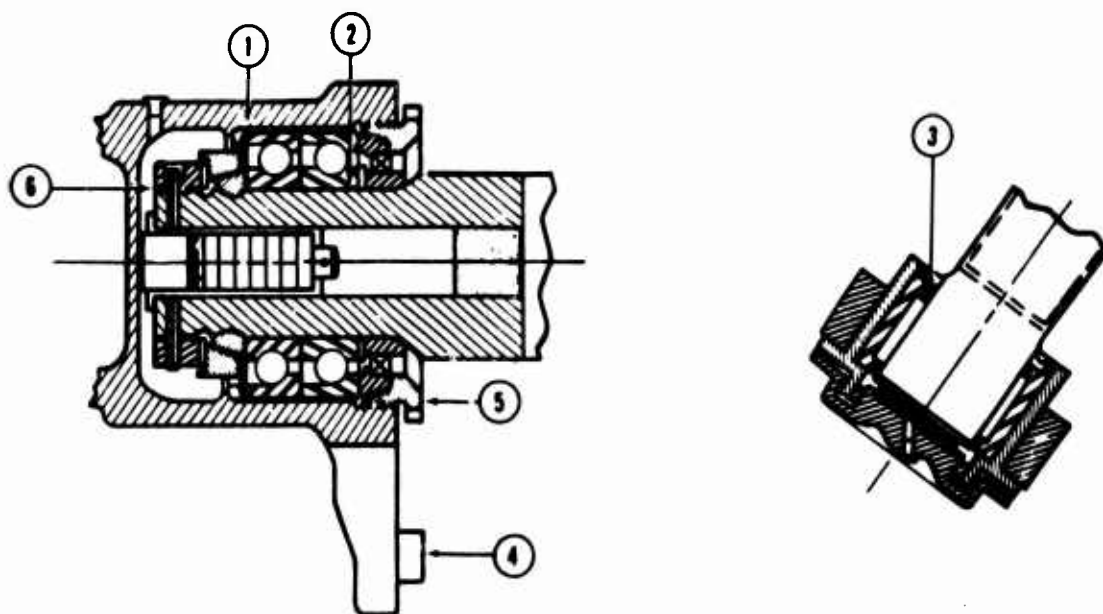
Tail Rotor Hub Assembly (P/N 204-011-801), Models UH-1C/D/H.
